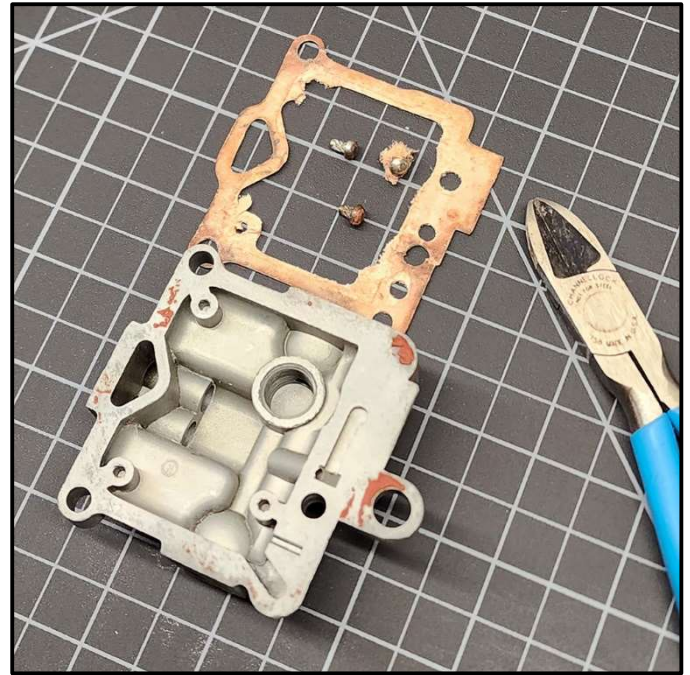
Used gasket and hammer drive screws removed, showing RTV from previous installation that needs to be cleaned off.
